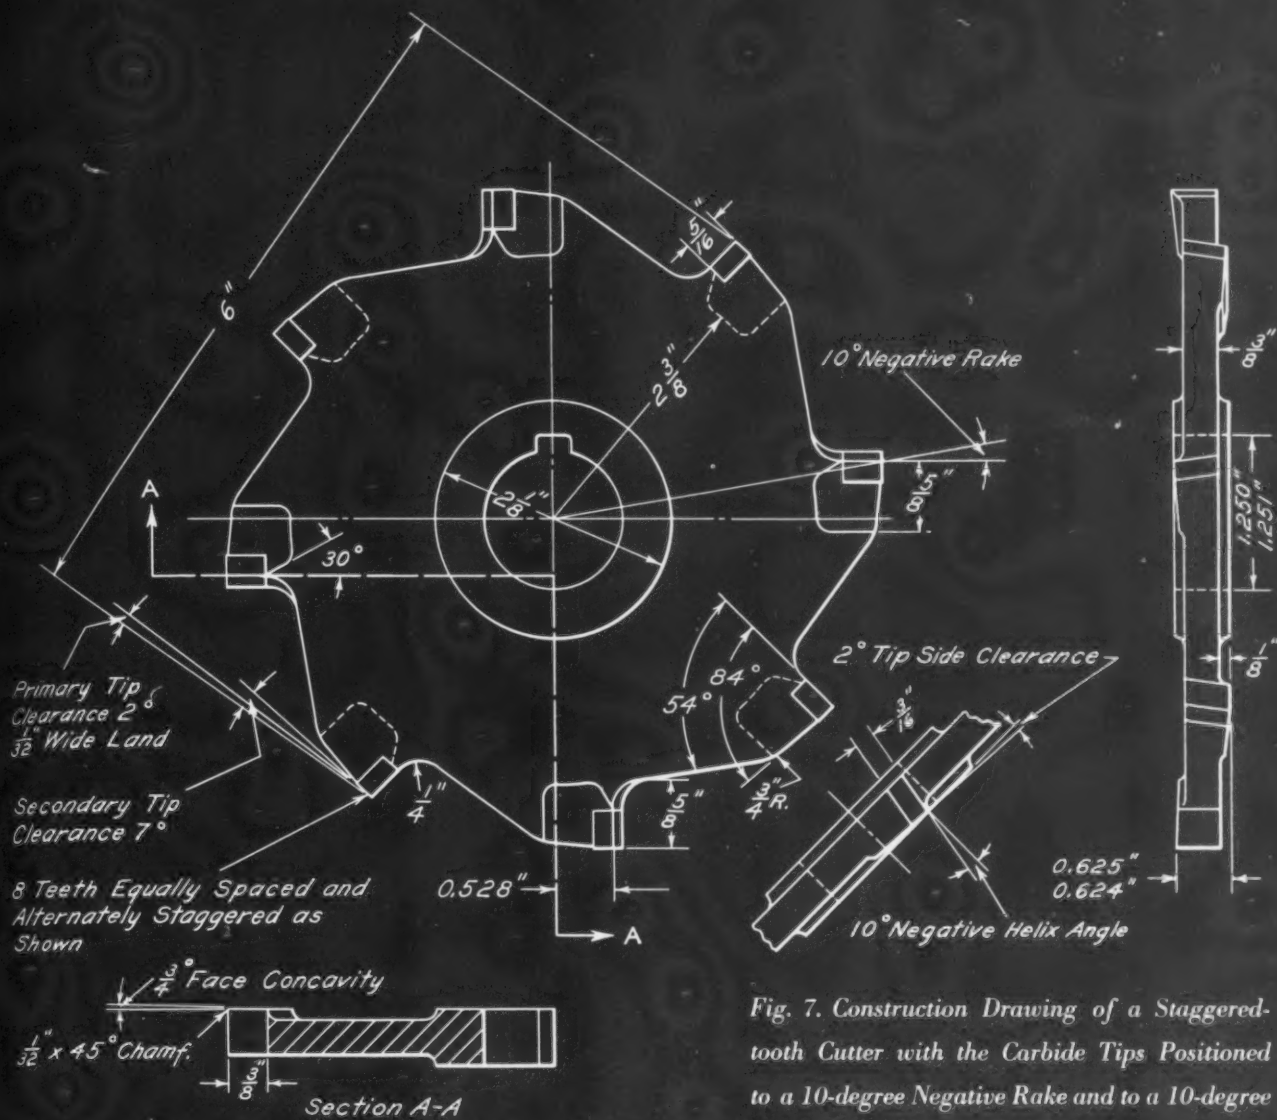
Construction Drawing of a Staggered-tooth Cutter with the Carbide Tips Positioned to a 10-degree Negative Rake and to a 10-degree Negative-helix Angle
